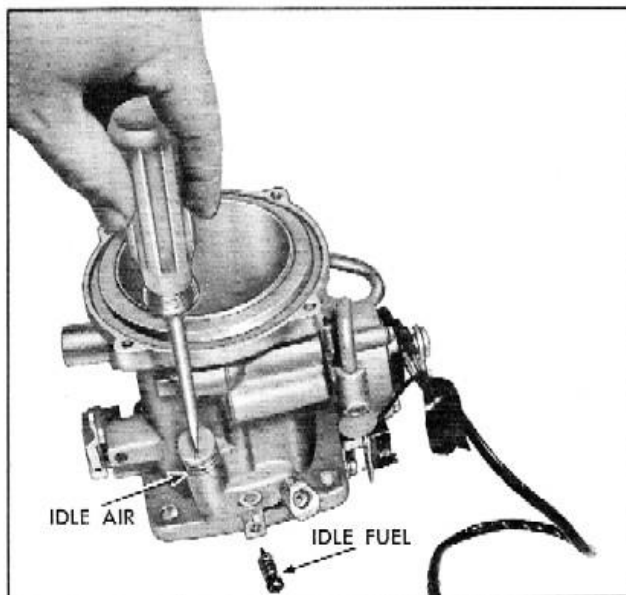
Installing Idle Fuel and Idle Air Adjusting Screws
